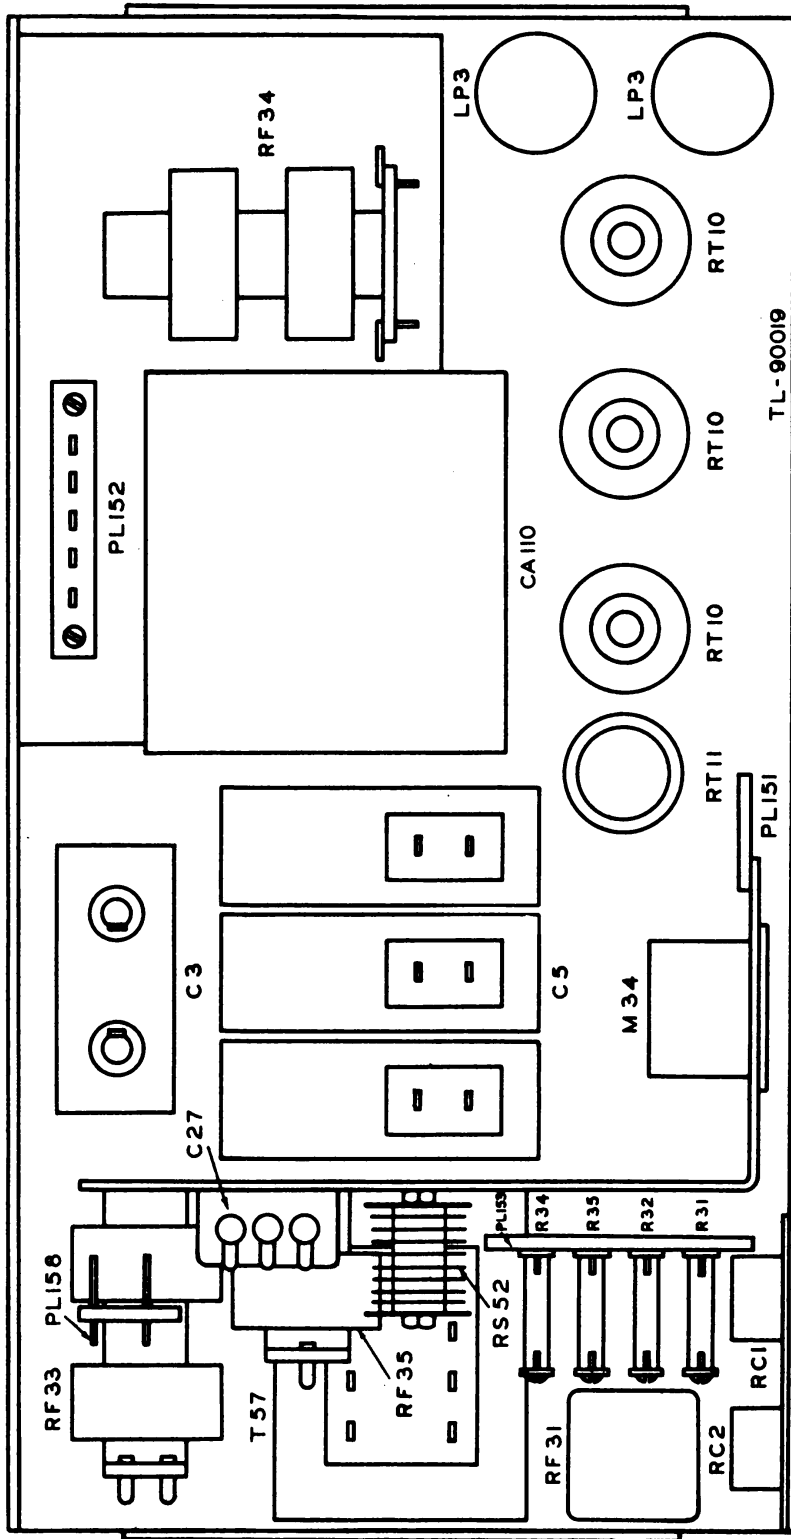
Rectifier RA-43-B, top view, cover removed, parts location diagram.
